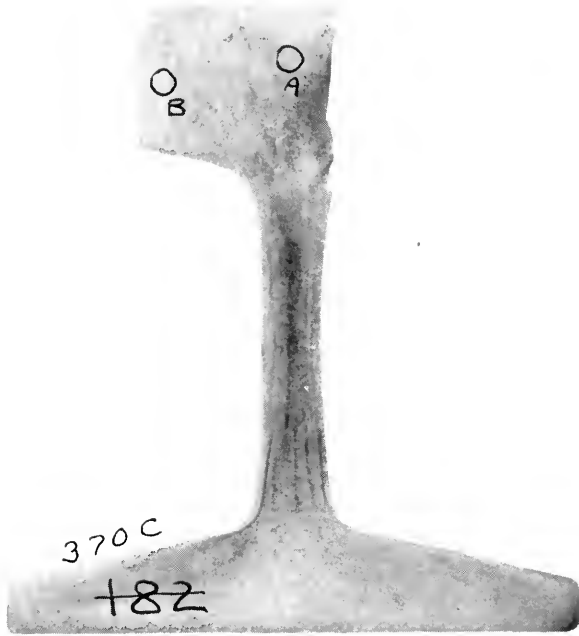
C. LIGHT ETCHING OF RAIL 370.
